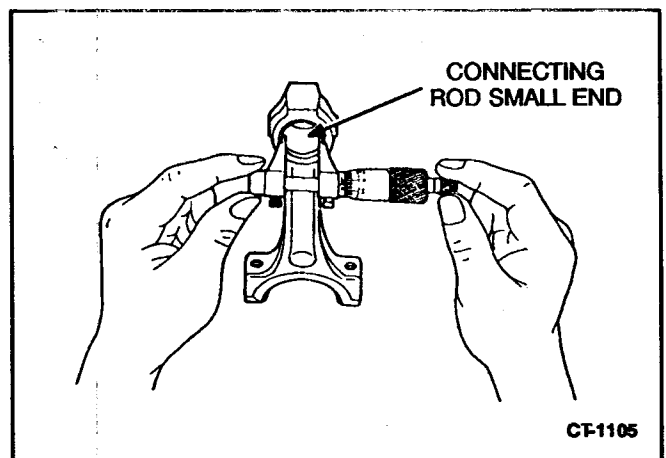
MEASURING CONNECTING ROD SMALL END
